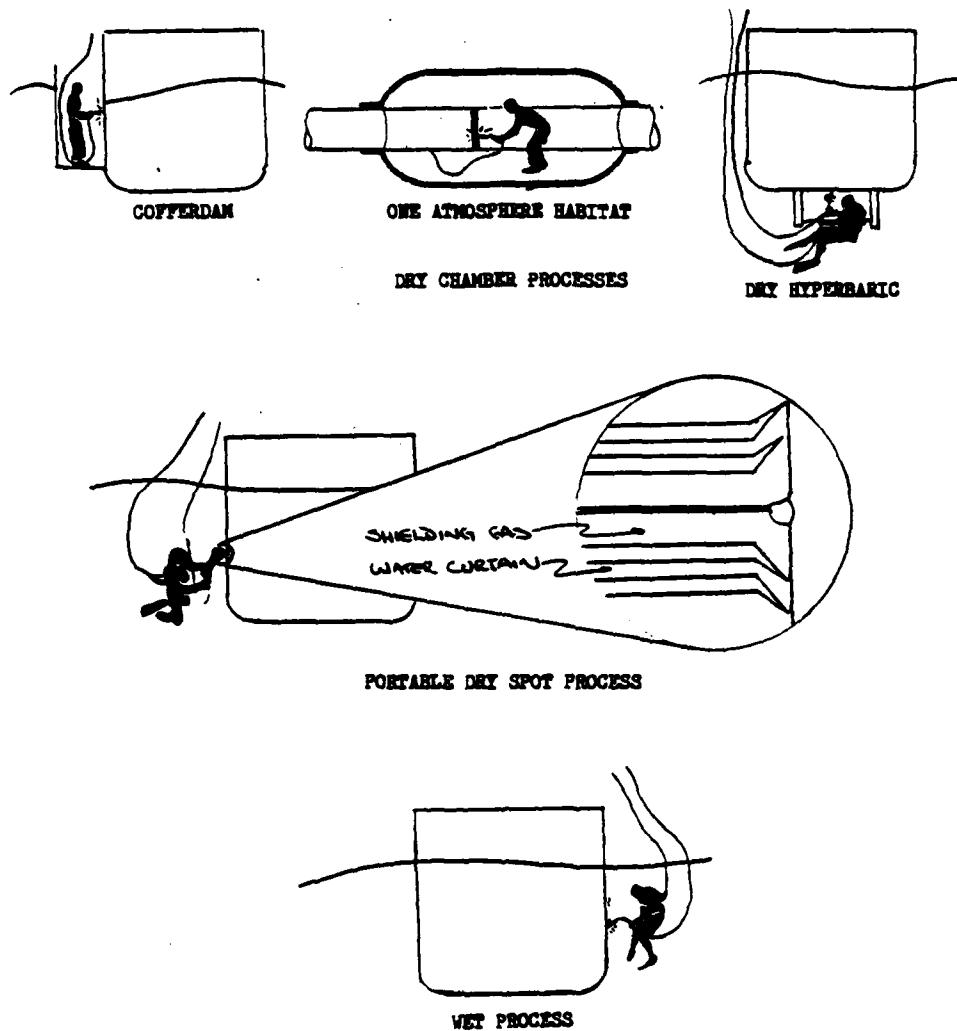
UNDERWATER WELDING PROCESSES
